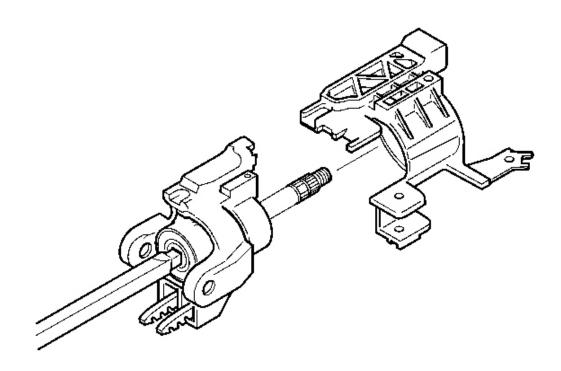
View Of Turn Signal Switch Housing & Steering Column Shaft Assembly Courtesy of GENERAL MOTORS CORP.
